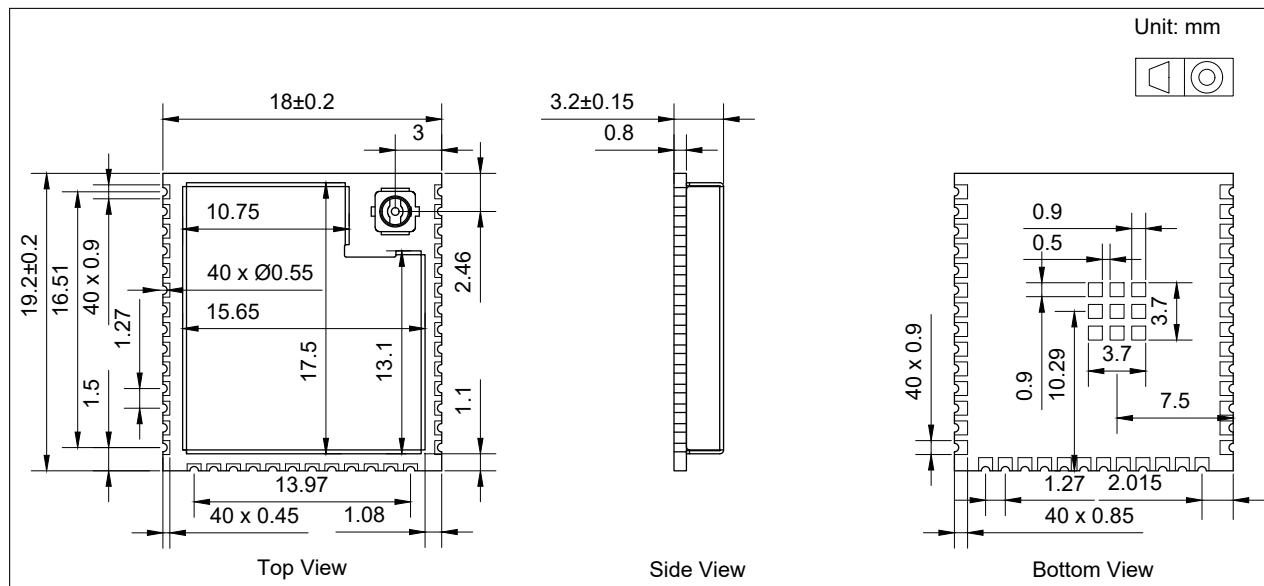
ESP32-S2-SOLO-U Physical Dimensions
